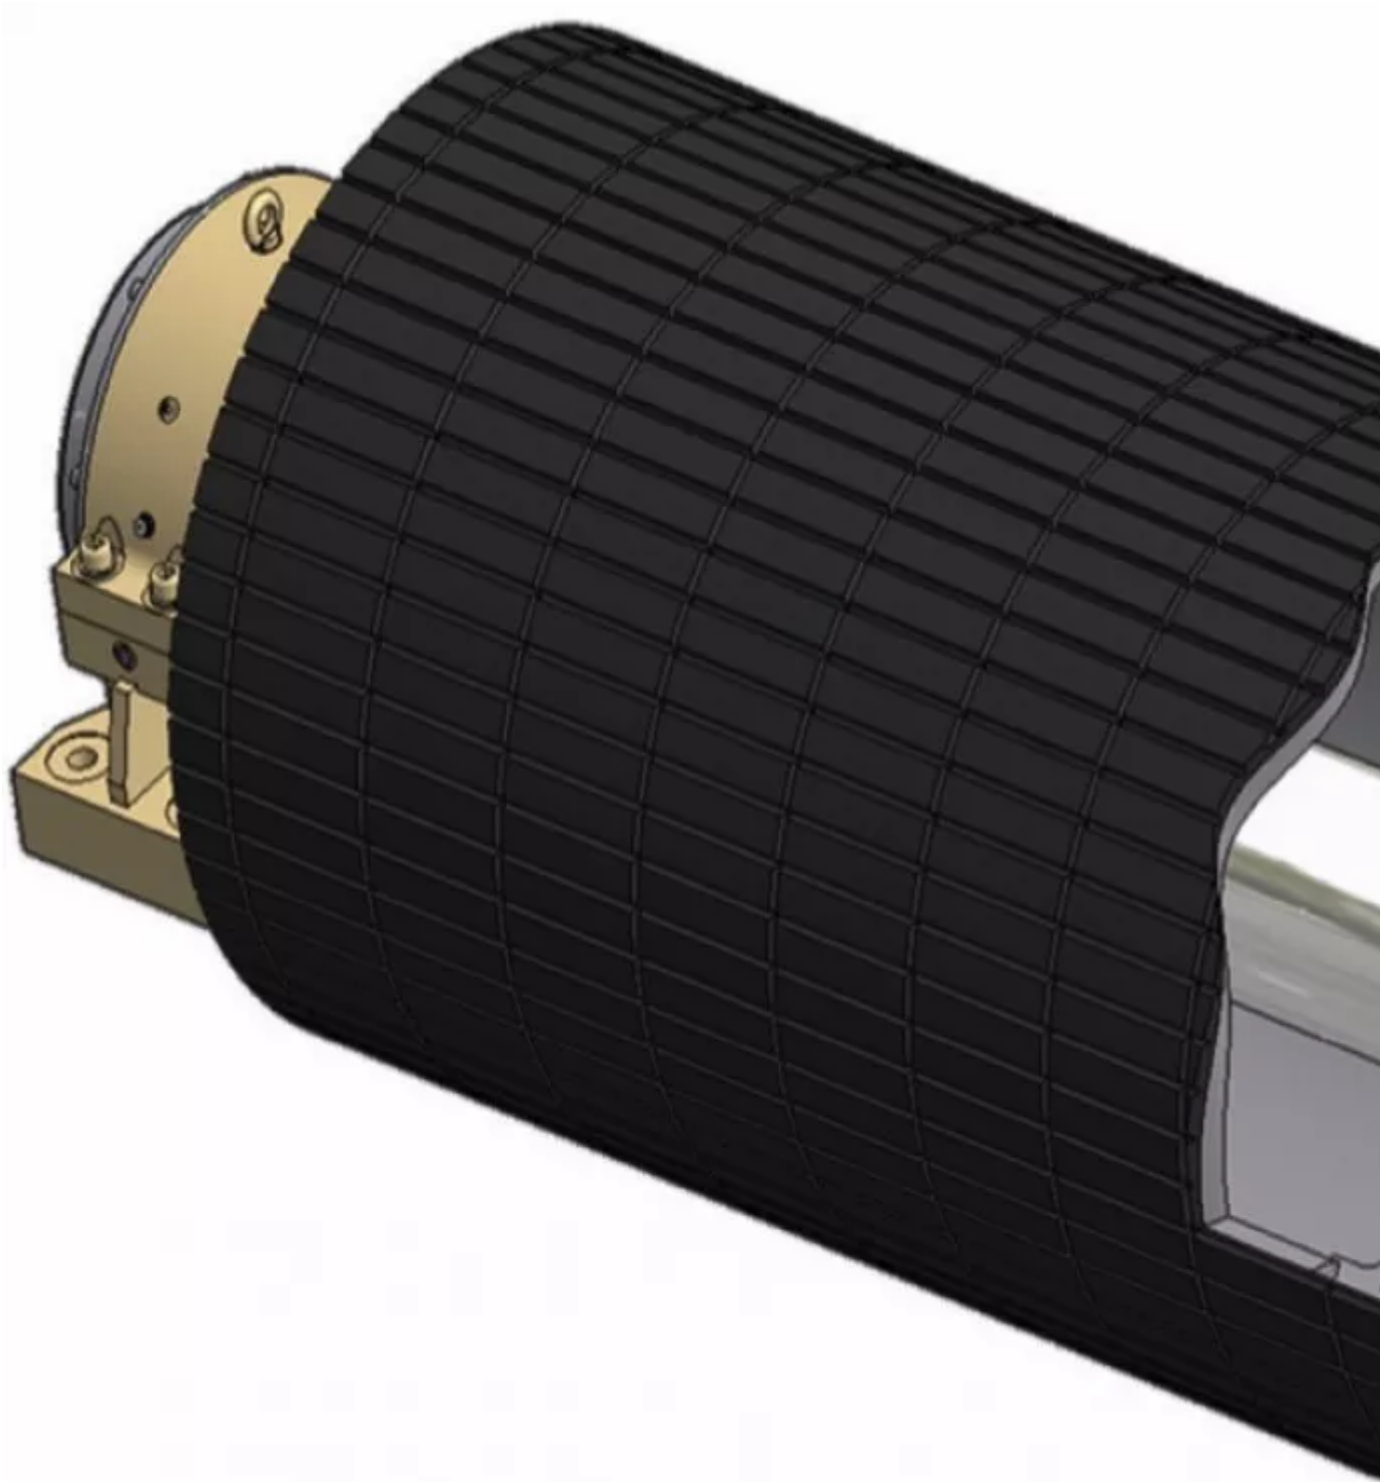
Drive pulley with connecting flange for the motors rotor. (Picture: © Takraf)
